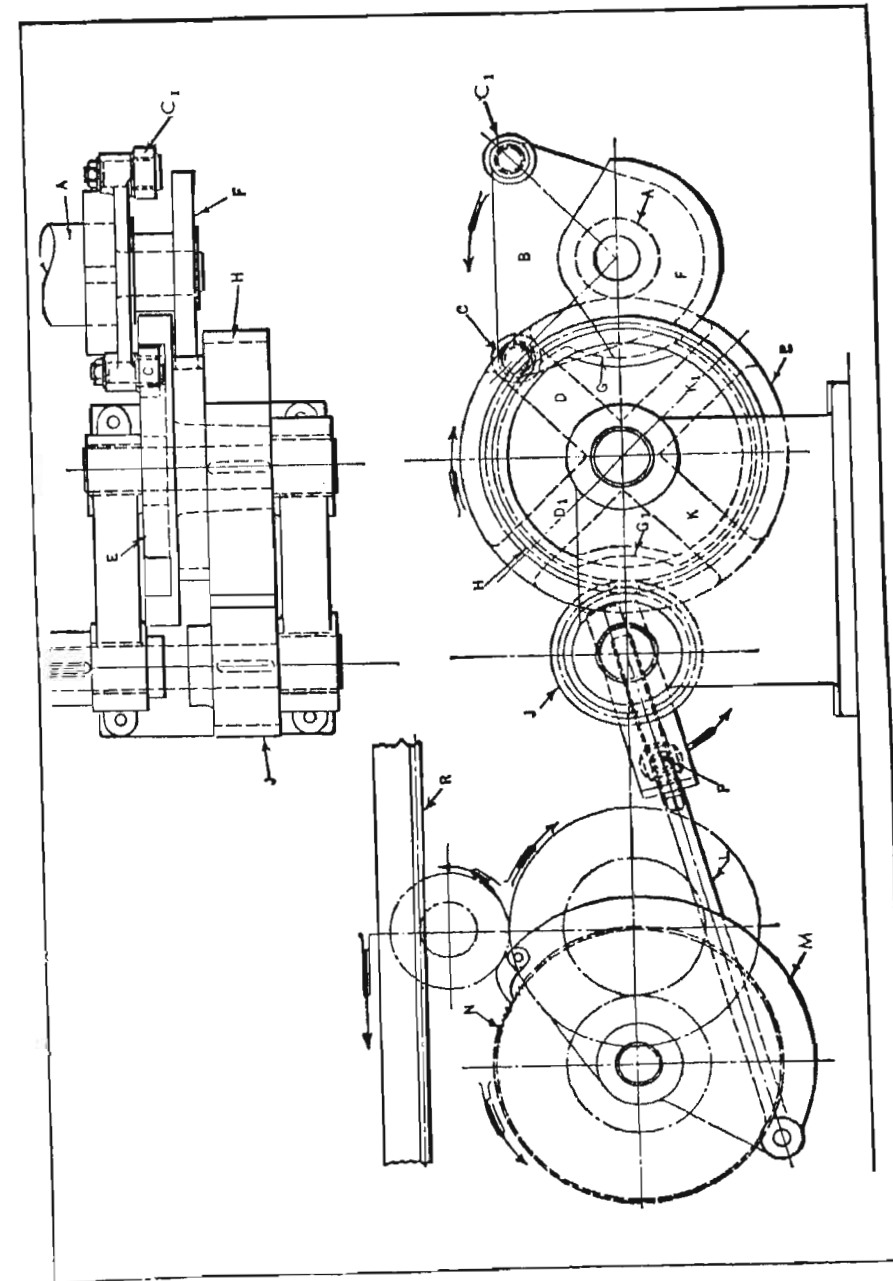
Indexing and Locking Mechanism for Spindle Head of Multiple-spindle Automatic Screw Machine
